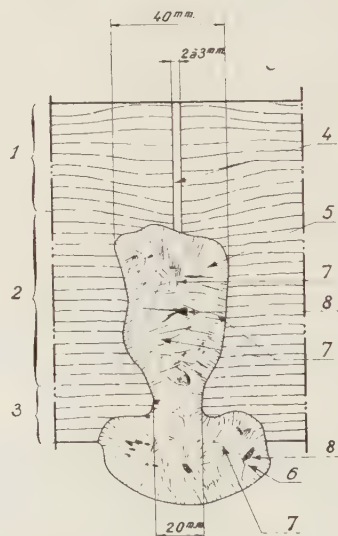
Vertical longitudinal diagrammatic section through a joint thermit-pressure welded with plate. (An intentionally badly made weld to show the casting defects).
